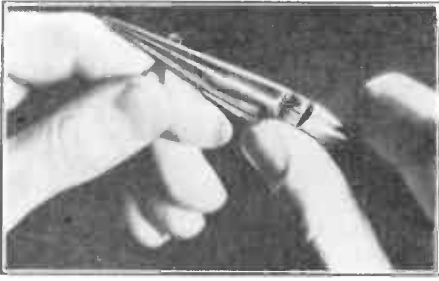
Method of bending a soldering lug with long-nose pliers. Bending should be done *before* the lug is bolted to the chassis; once a flat lug is bolted to a chassis, it is difficult to pry the lug upward to a convenient soldering position.
